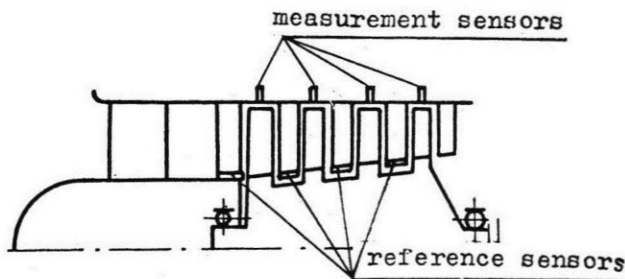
Arrangement of sensors typical of the traditional DPM measurement.
